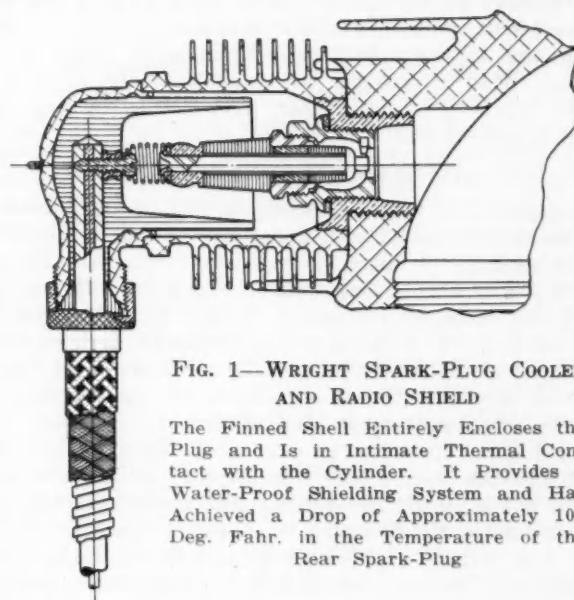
WRIGHT SPARK-PLUG COOLER AND RADIO SHIELD
